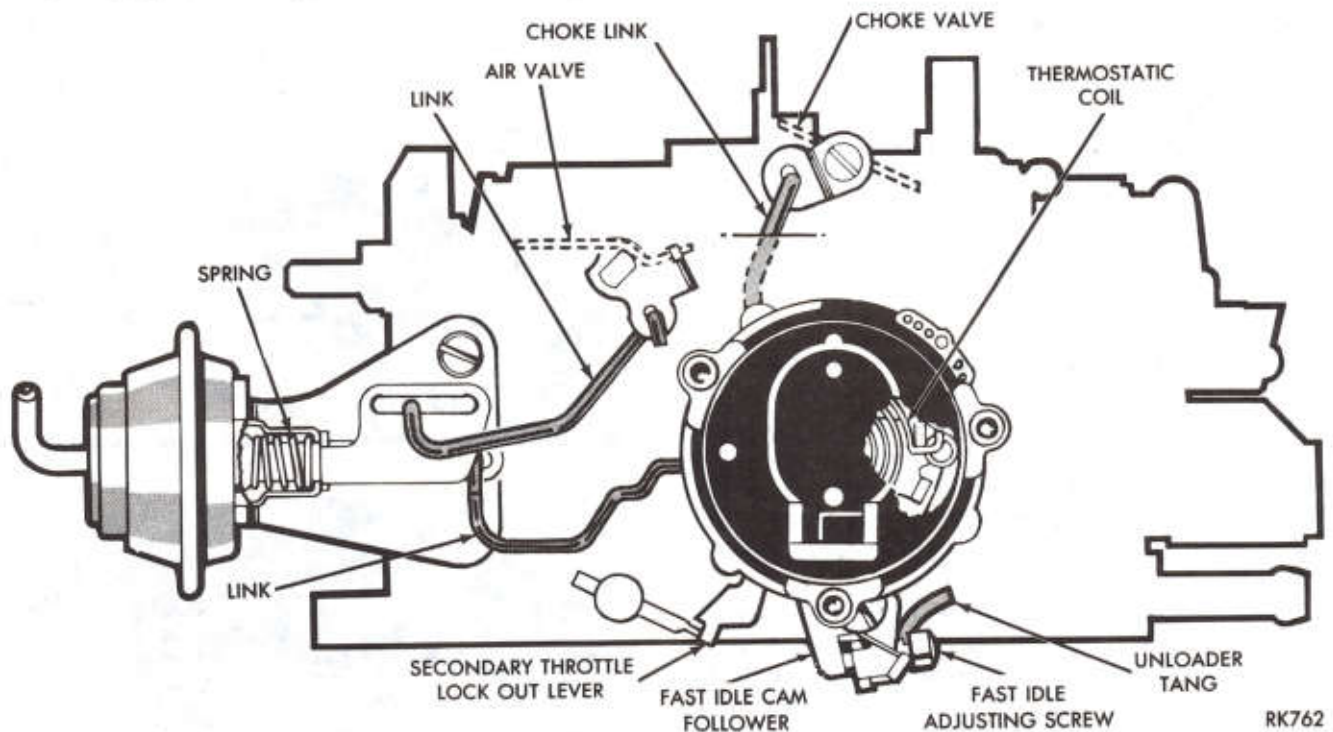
Apply Solvent to Choke Shaft Secondary Linking and Fast Idle Cam (5.9L Engine)
